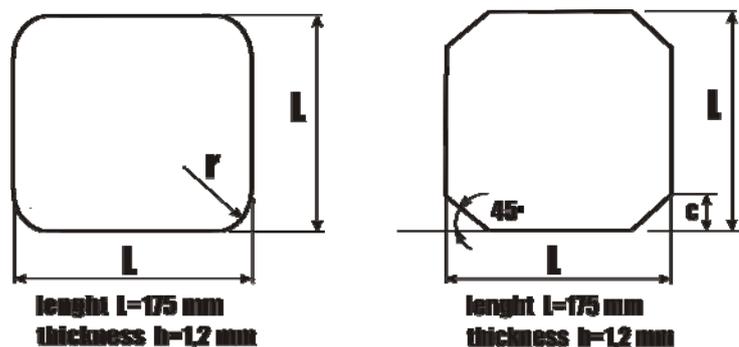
Geometric dimension and configuration of the (a) rounded and (b) chamfered plates
